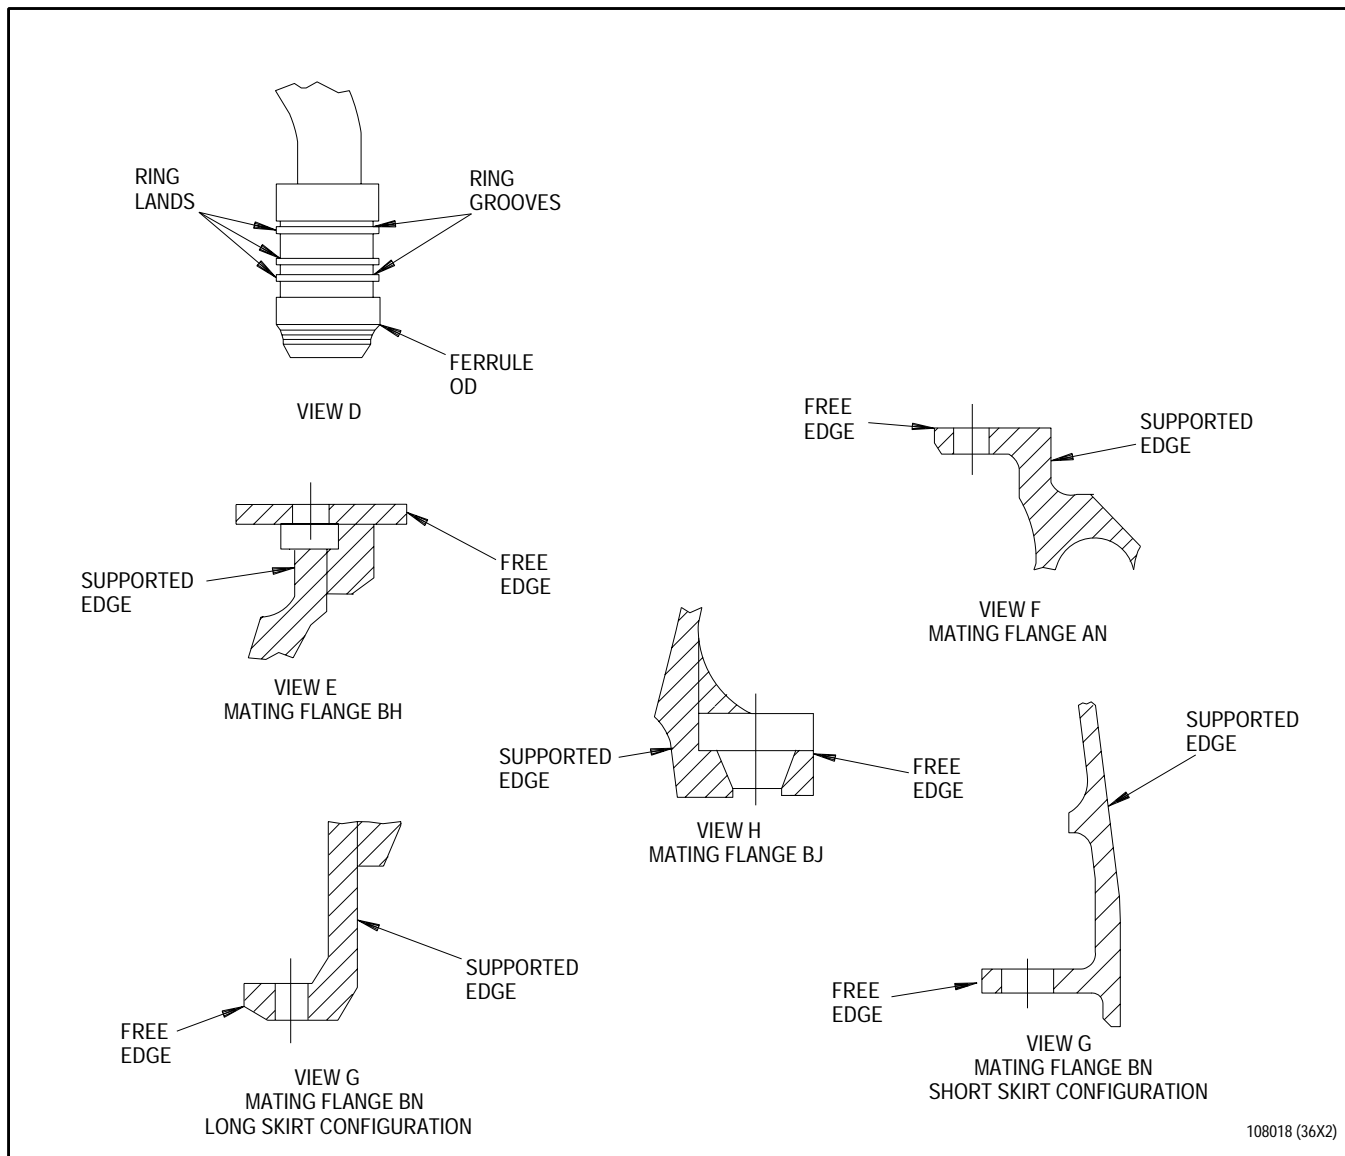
Diffuser Case Assembly - Inspection (Sheet 4 of 5)
